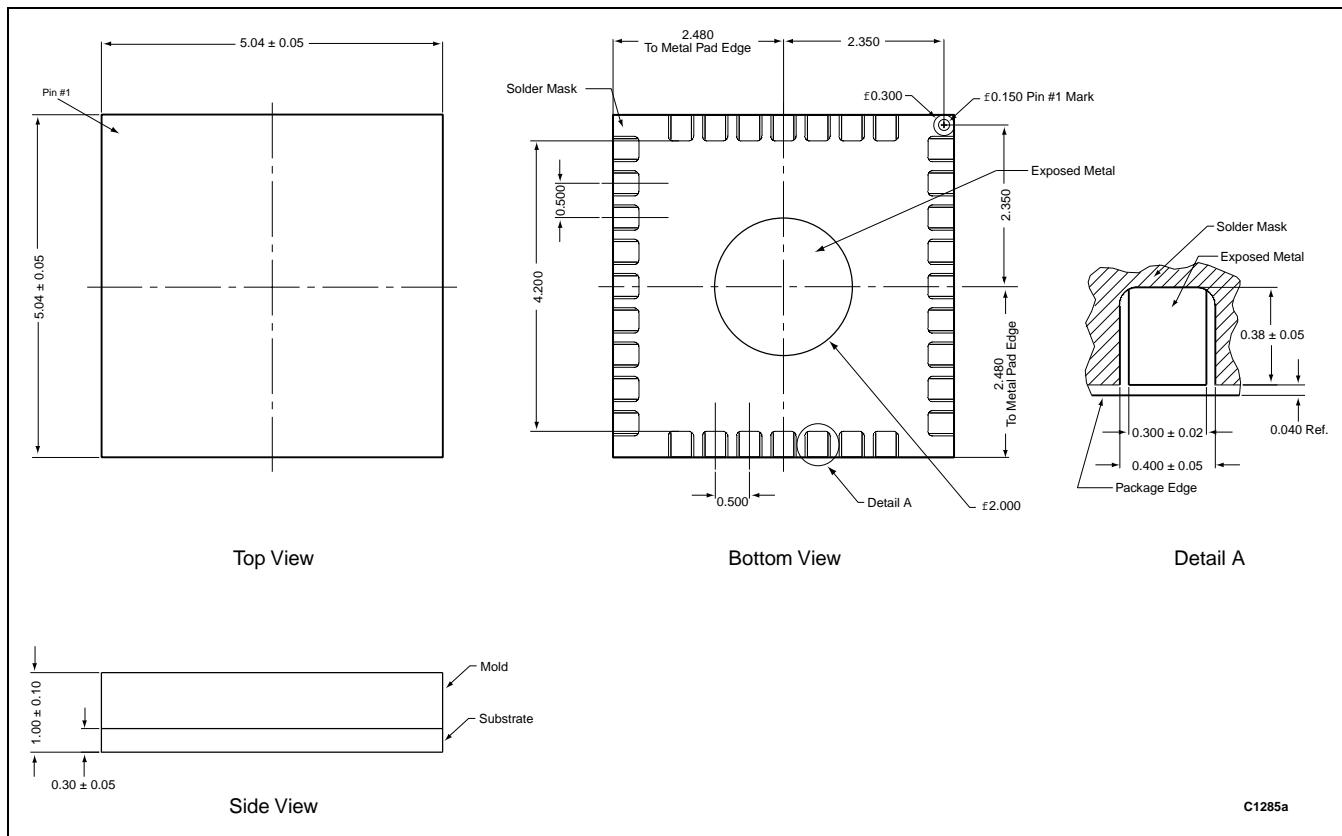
SKY73001 32-Pin RFLGA Package Dimension Drawing
